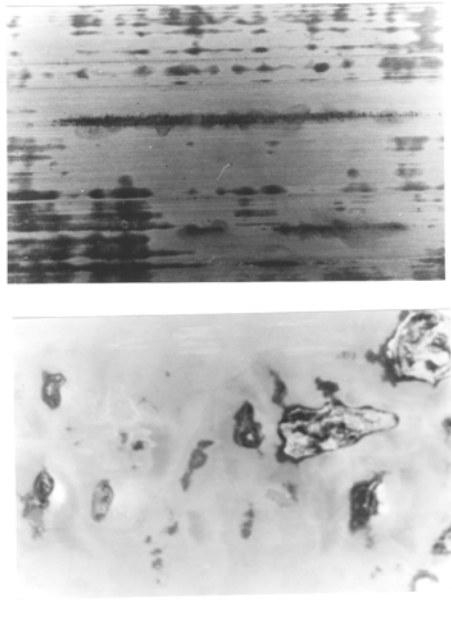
Plastic coating condition Grade C – heavy wireline damage in tool joint I.D. and/or large blisters: 60-80% intact
